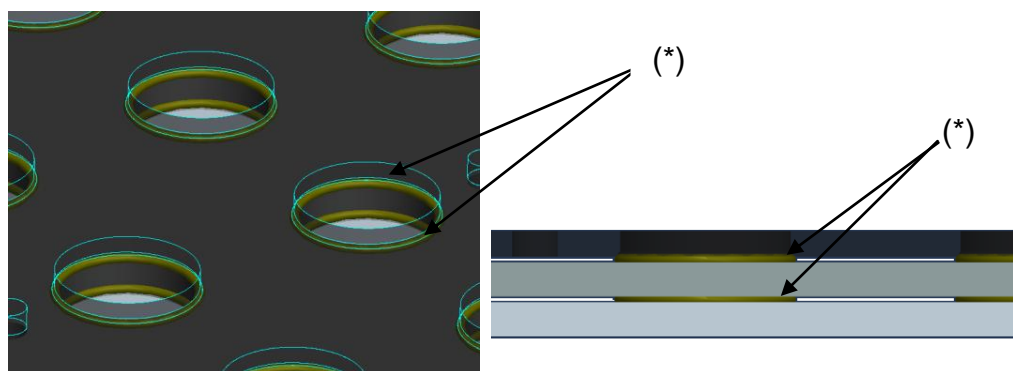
Position of the O-rings (\*) between three aluminum plates
